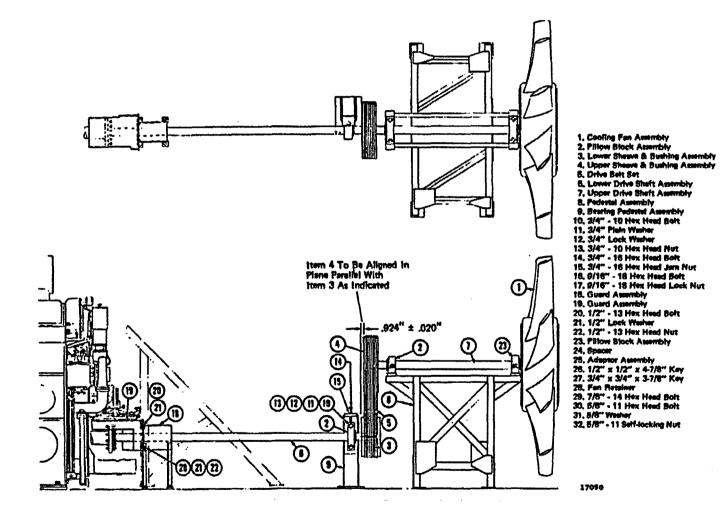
MP45A Cooling Fan and Drive Assembly
